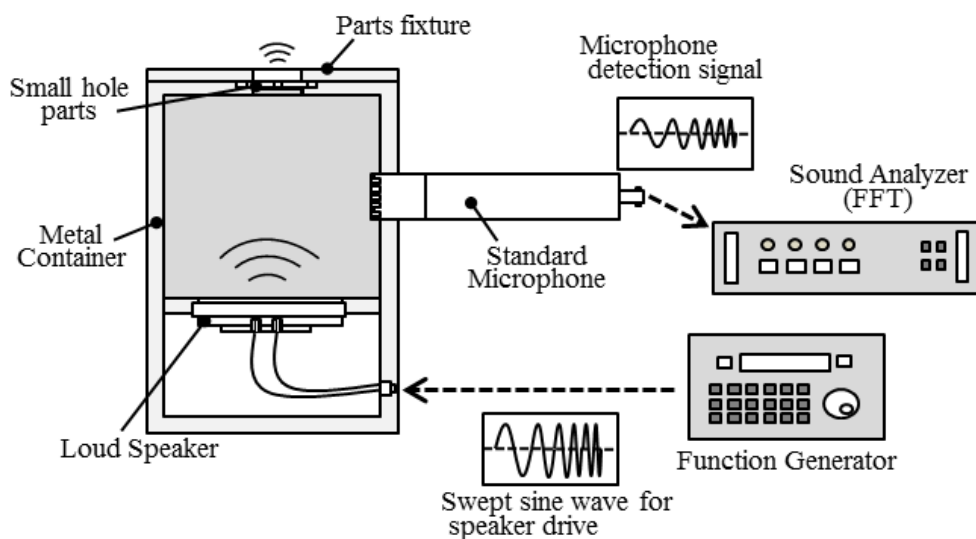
Configuration of the inspection system and the structure of the inspection container.
